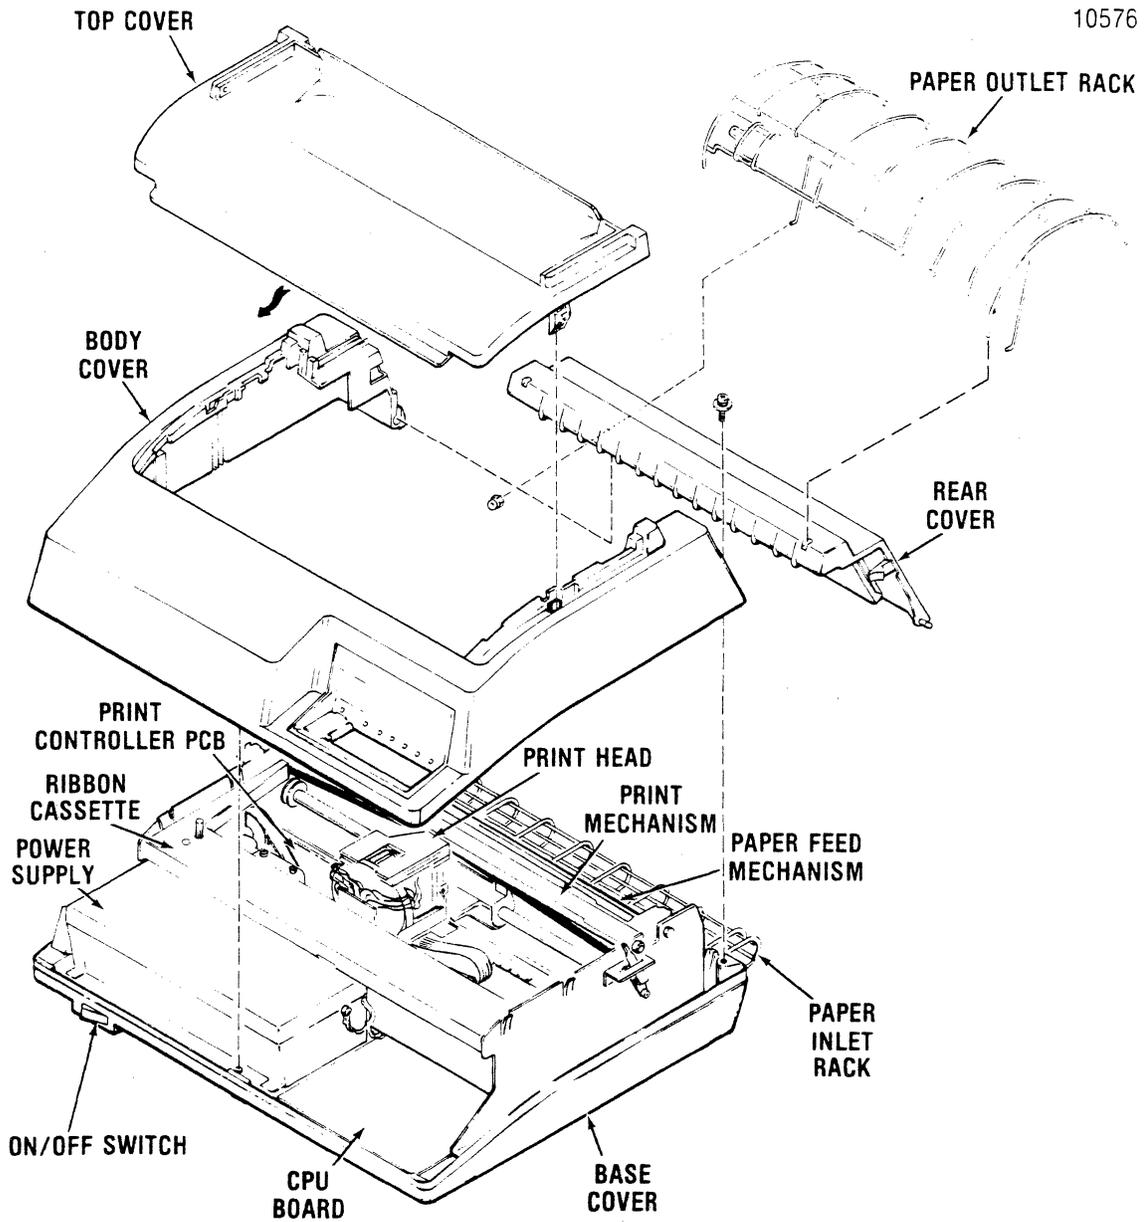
Removal/Replacement, Paper Outlet Rack Assy, Paper Inlet Rack, Cover Assemblies, and Cover Interlock Magnet
